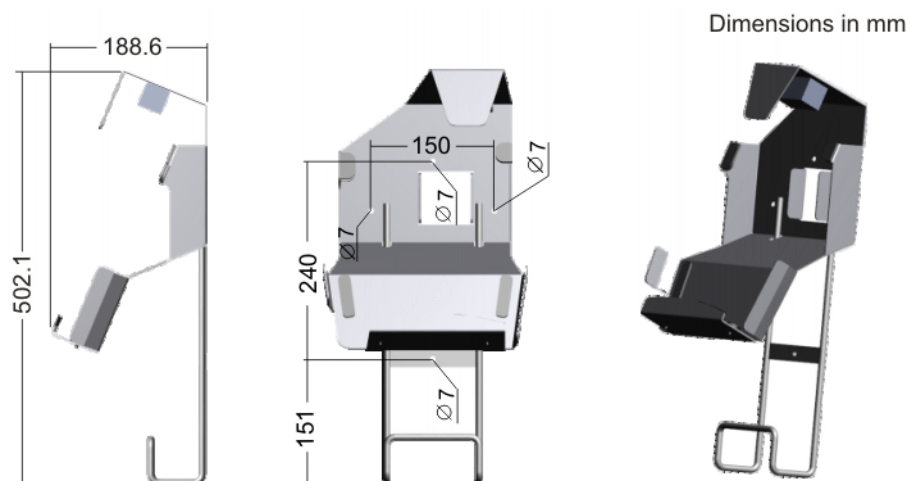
Dimensions and drilling locations for smartPAD holder
